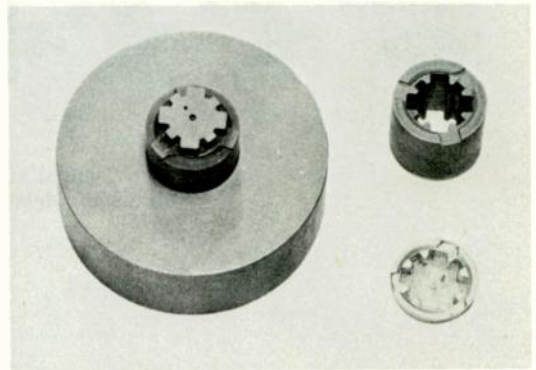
Carbide fuse body punch (l.h.), cutting tool (upper r.h.) and punch product (lower r.h.).
